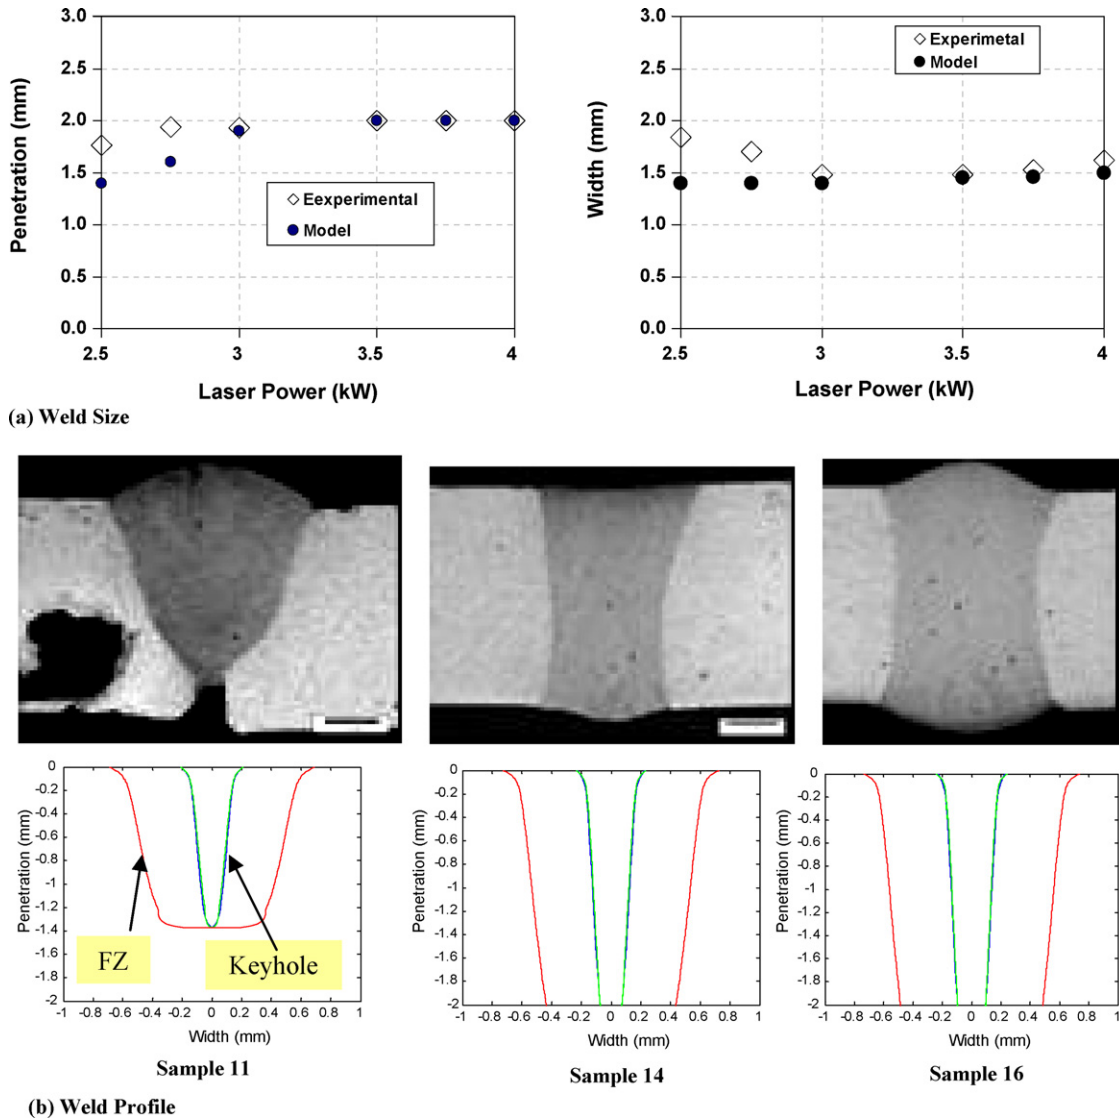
Comparison between experimental and calculated weld geometry for laser welding of 2 mm plates at variable laser power (a) weld size (b) weld.
